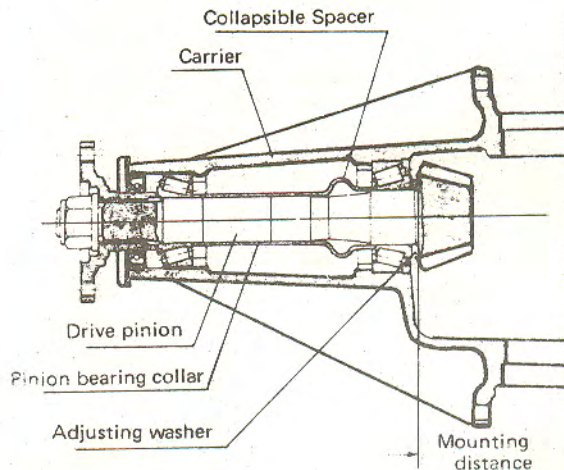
Sectional view of the drive pinion carrier to show the location of the parts.
